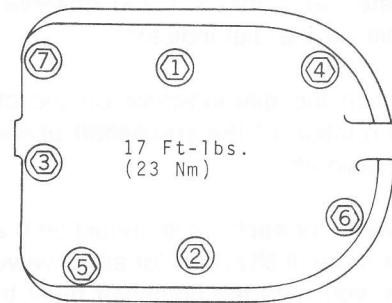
Cylinder Head Bolt Tightening Sequence (200 and 208 Tractor)
